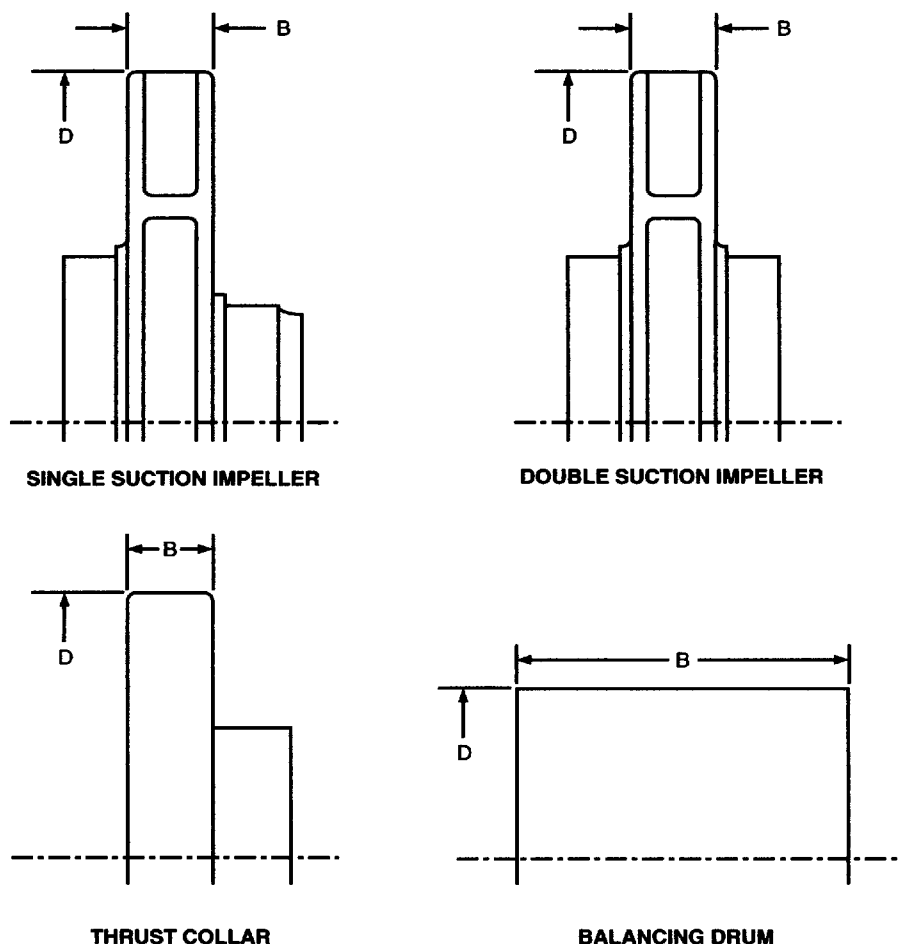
Rotating Component Dimensions to Determine When Single Plane Balancing Is Allowable
